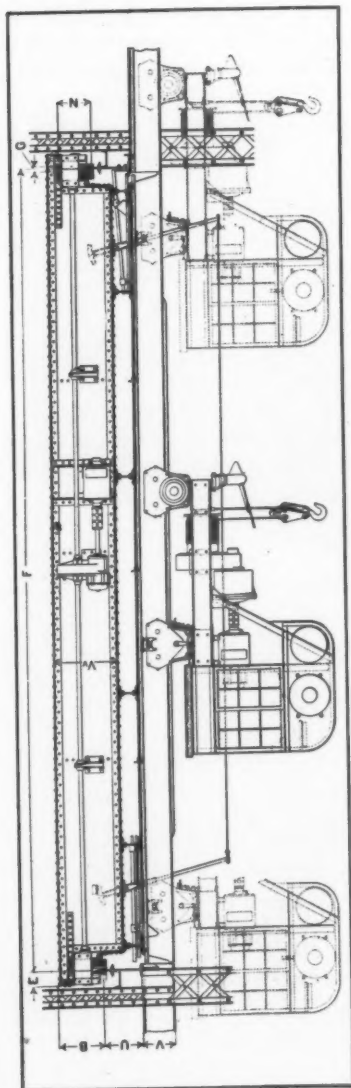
MONORAIL TRANSFER BRIDGE AND HOIST
